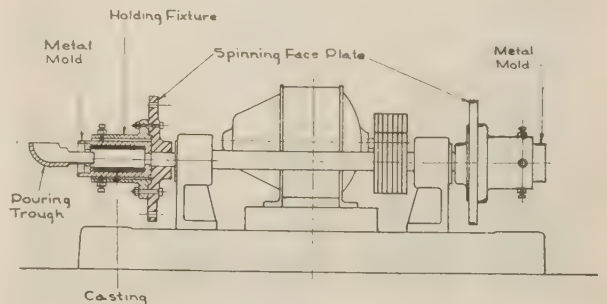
TRUE CENTRIFUGAL CASTING MACHINE WITH MOLD DIRECT-DRIVEN
